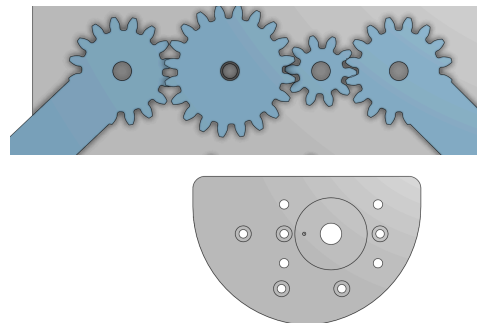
Gearing Closeup (top), Back view of the gear plate (bottom)
